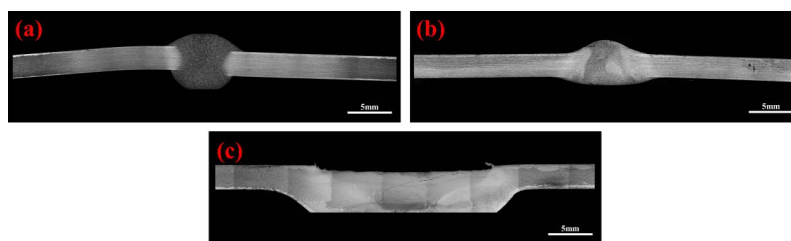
Macroscopic morphology of welded joints: (a) CMT; (b) TIG; (c) FSW
